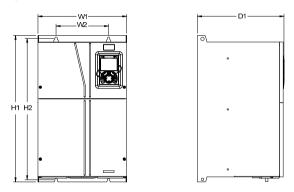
Wall-mounting diagram of inverters of 660 V, 22 to 132 kW
